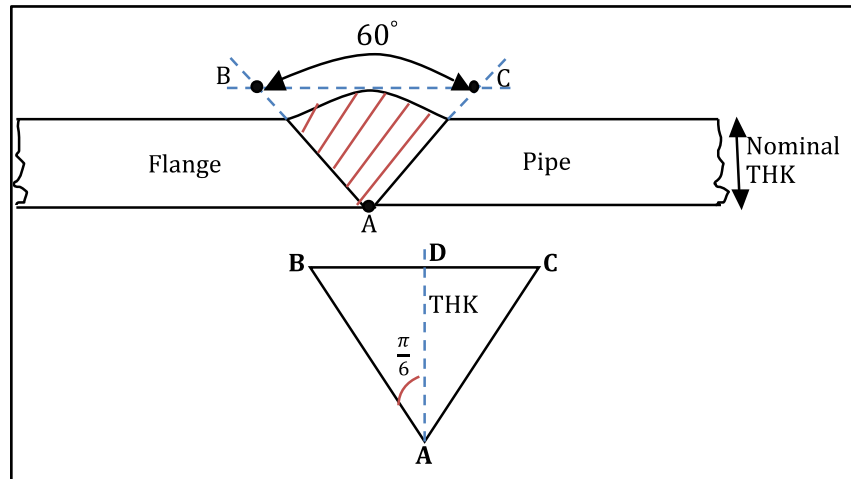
Geometry of Welding Area for RFWN Flange
